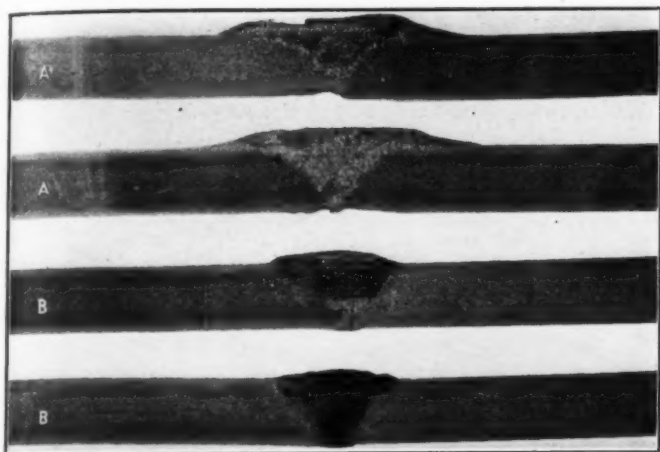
General Appearance of Firebox Steel Specimens; A Welded By the Gas Method; B—Welded By the Electric Method
